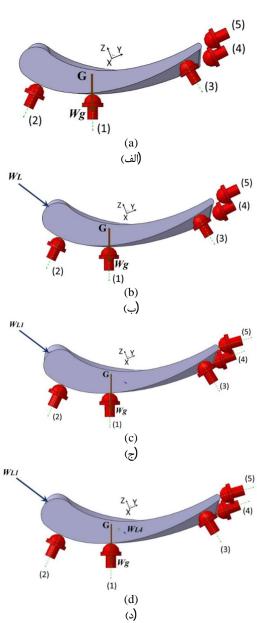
The procedure of workpiece loading into the fixture a) resting on the base locators b) the position of nearly contact the side locators c) making contact with the side locators while keeping contact with the base locators d) making contact with the stop locators while keeping contact with the base and side locators
